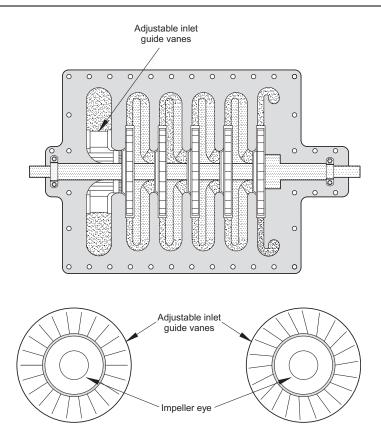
Cutaway of a centrifugal compressor illustrating adjustable guide vanes.
